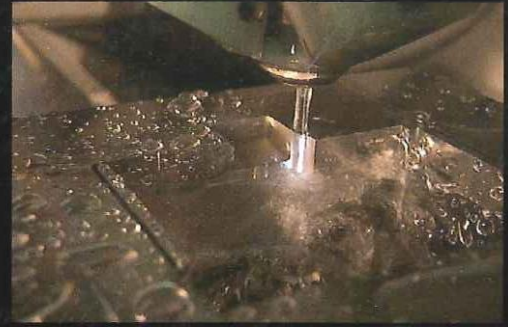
ELECTRICAL DISCHARGE MACHINING
